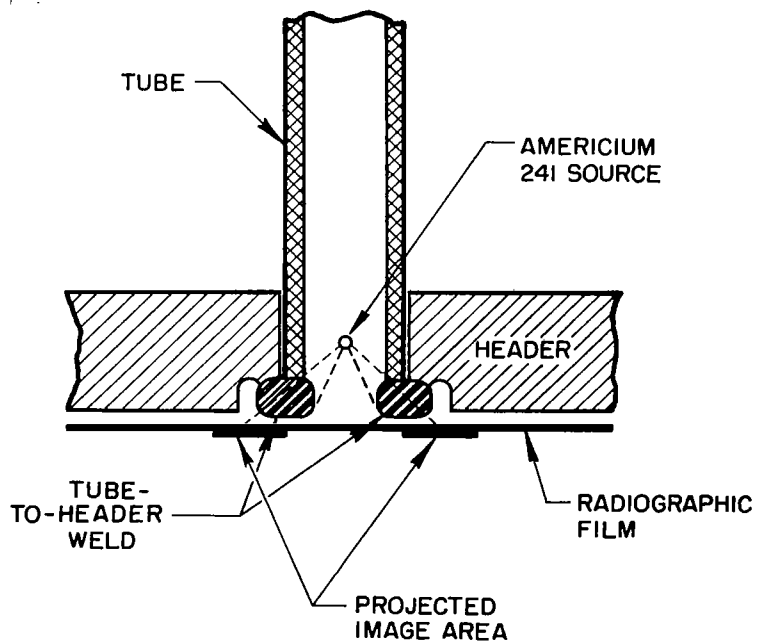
Condenser Tube-to-Header Weld Inspection Technique
